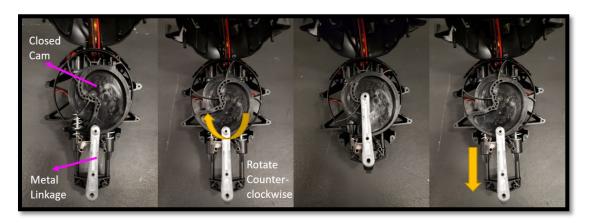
Jumping Rover 1's Jumping Mechanism Top View
